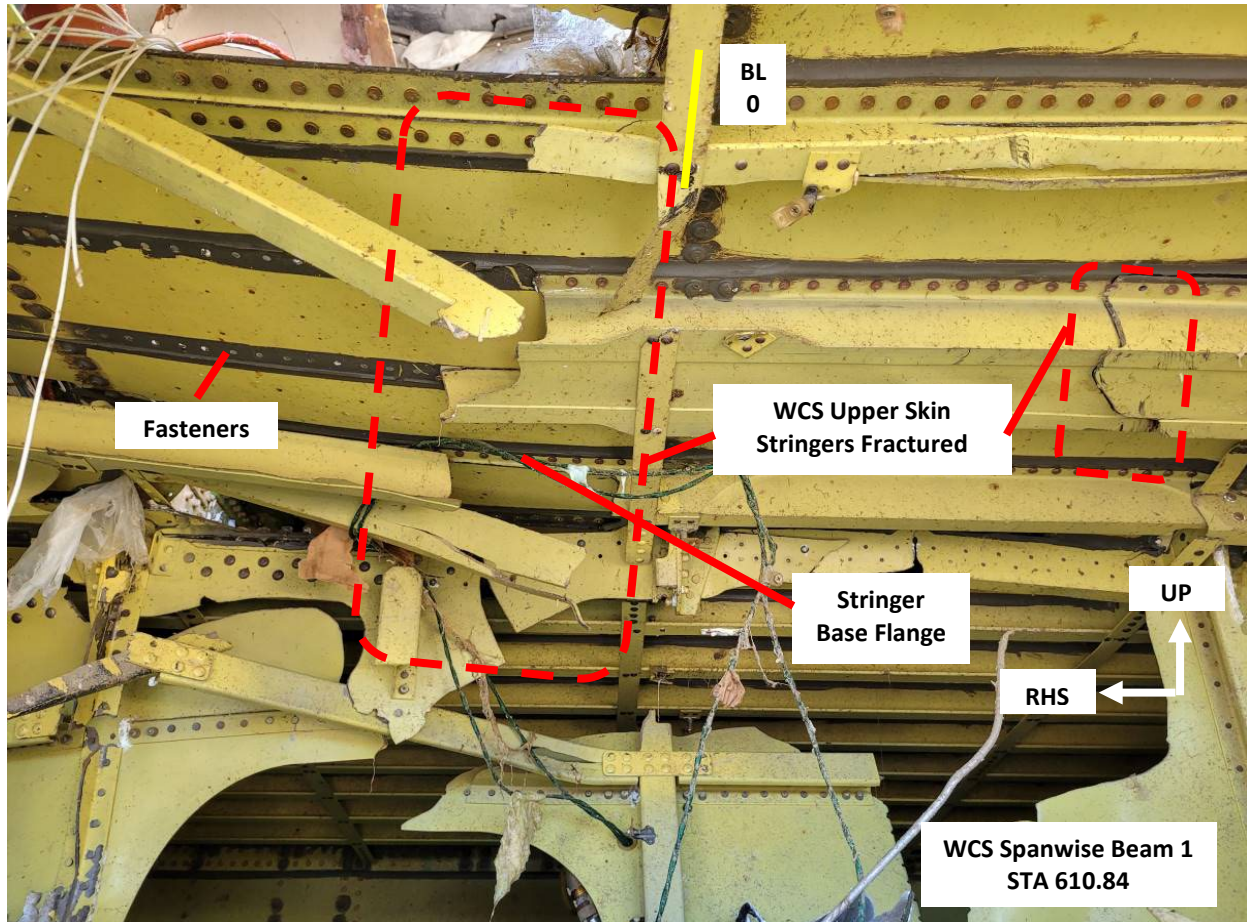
Upward aft view of WCS Upper Skin Panel and fractured stringers (Boeing photo)
